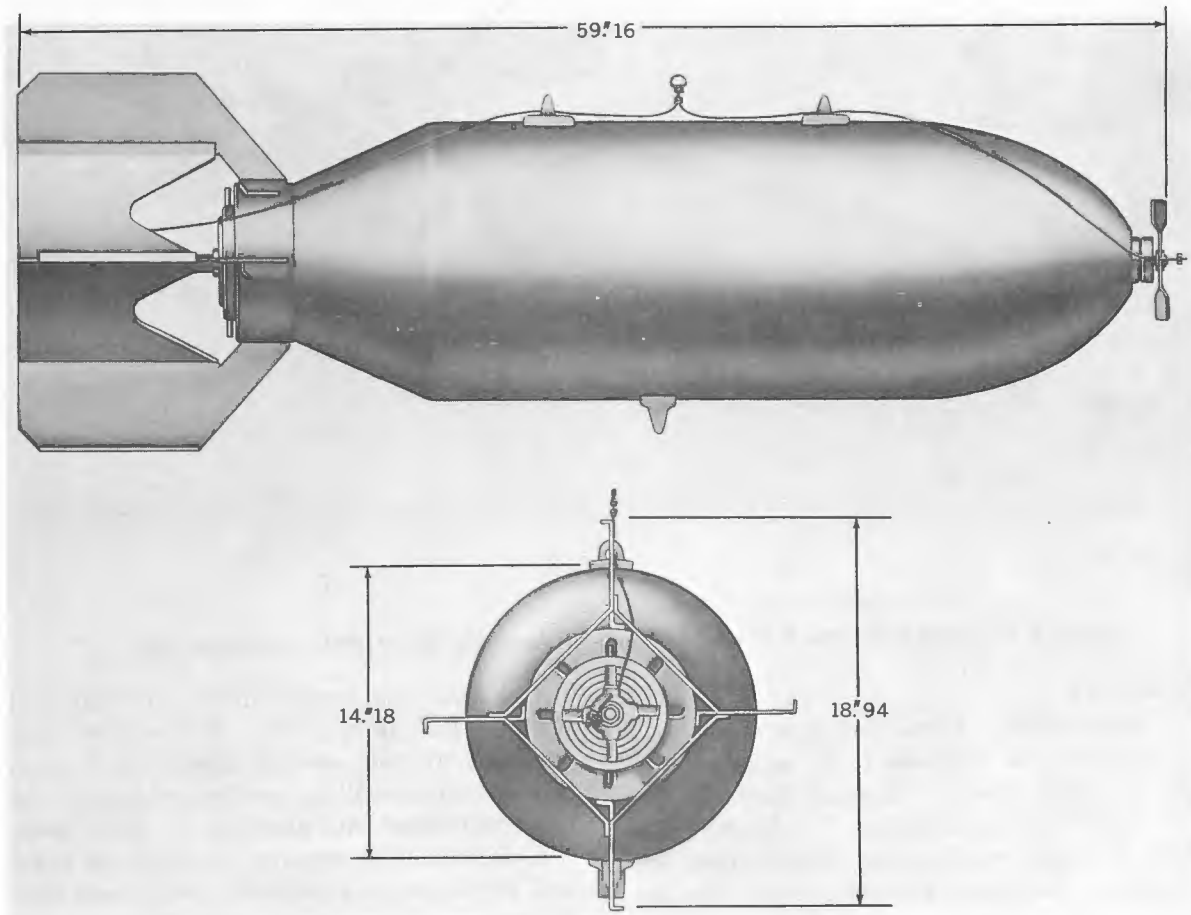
500-lb GP Bomb AN-M64A1 with Fin Assembly AN-M109A1, Exterior View.
